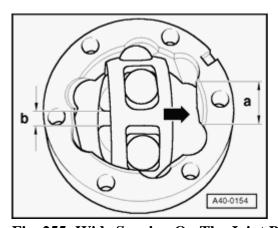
Wide Spacing On The Joint Body Aligned With The Narrow Spacing On Hub
